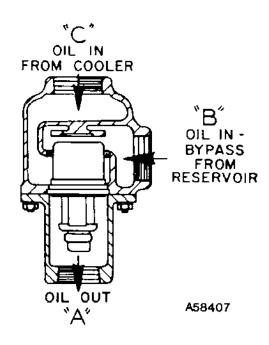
THERMOSTATIC MIXING VALVE
